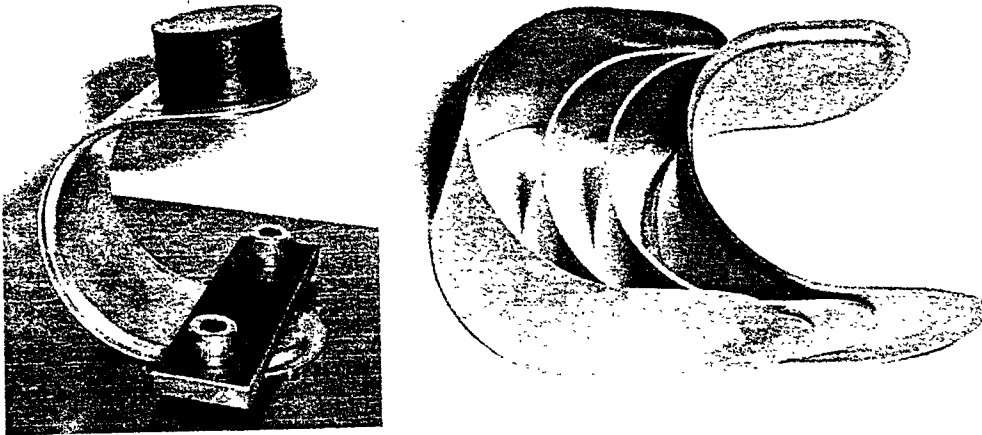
Leaf Spring Prototype. Photograph on right shows beryllium copper parts before assembly (viscoelastic material not shown).
